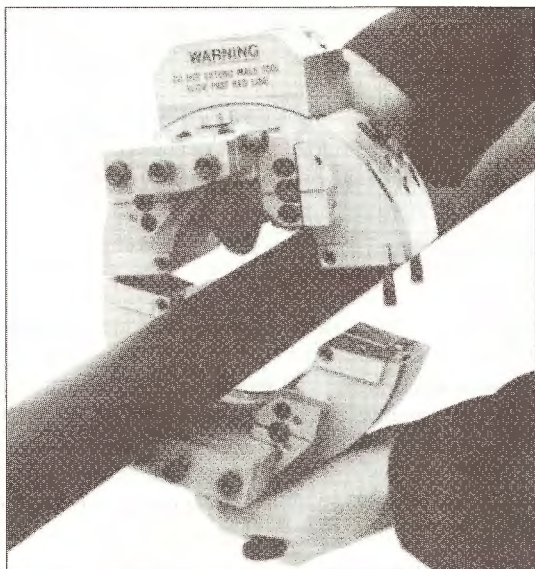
Fastening of a detachable pipe cutter on a pipe to be cut.
